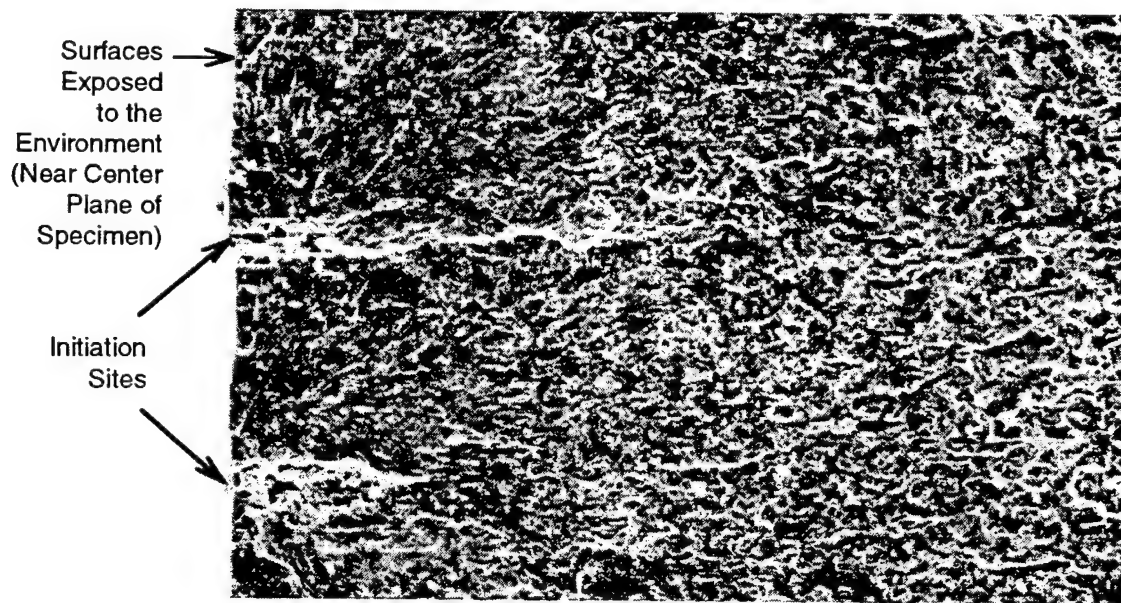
FRACTURE SURFACE APPEARANCE OF BARE 2024-T3 FATIGUE SPECIMENS TESTED IN AIR. (CONCLUDED)
